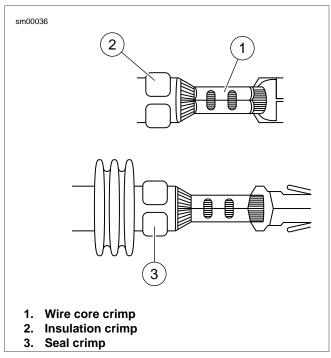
Metri-Pack Connector: Inspect Core and Insulation/Seal Crimps
